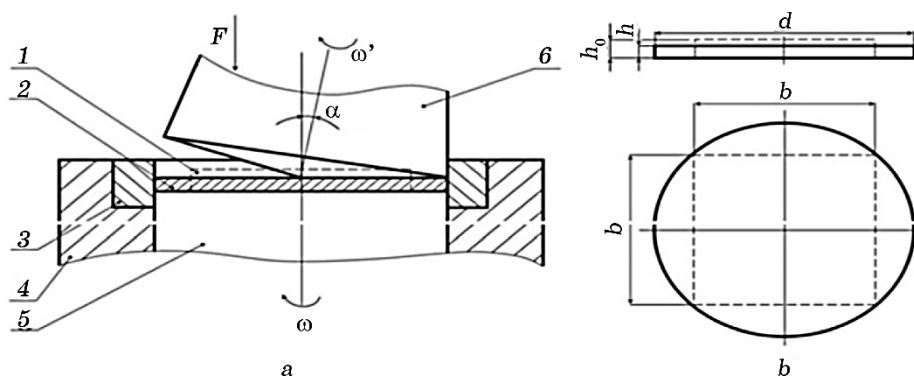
Scheme of reshaping of workpieces by the SR method (a), view of the original square and rolled round workpiece (b): 1—workpiece, 2—product, 3—matrix, 4—spindle, 5—ejector, 6—roll.
